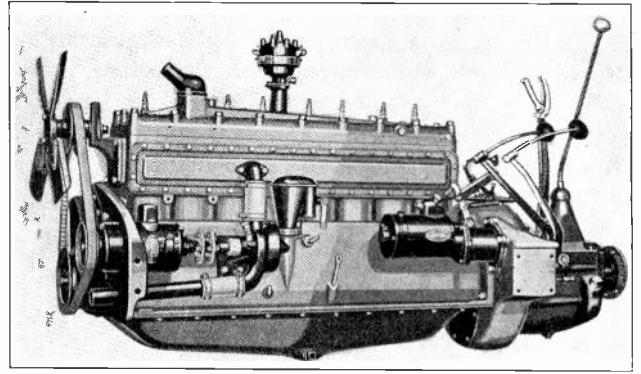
Side view of an eight-cylinder Studebaker engine showing location of starting motor attached to the flywheel housing on the right.
